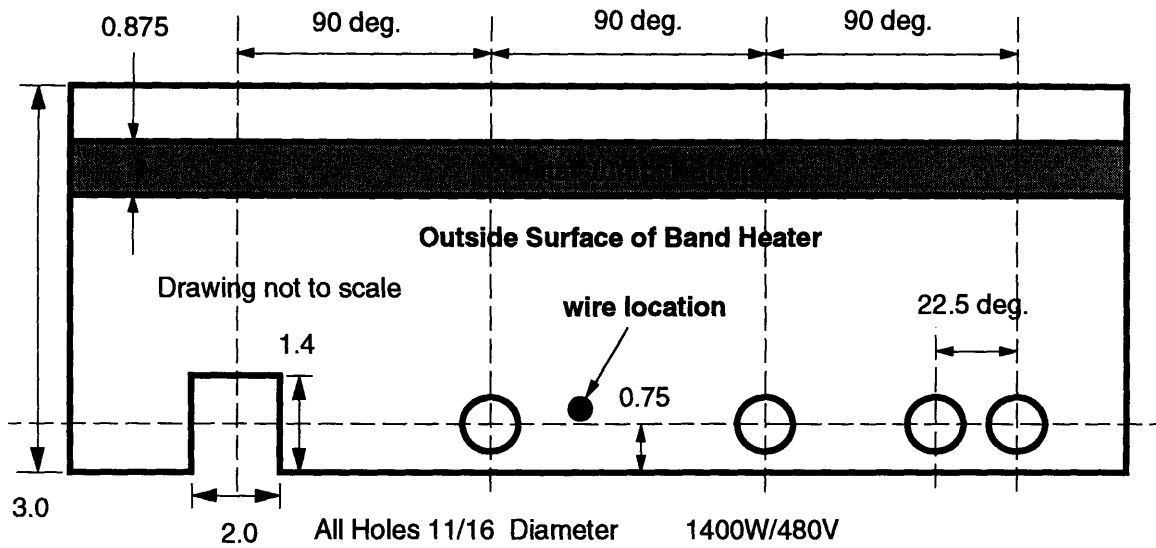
Extruder Head/Gear Pump Inlet Flange Band Heater.
